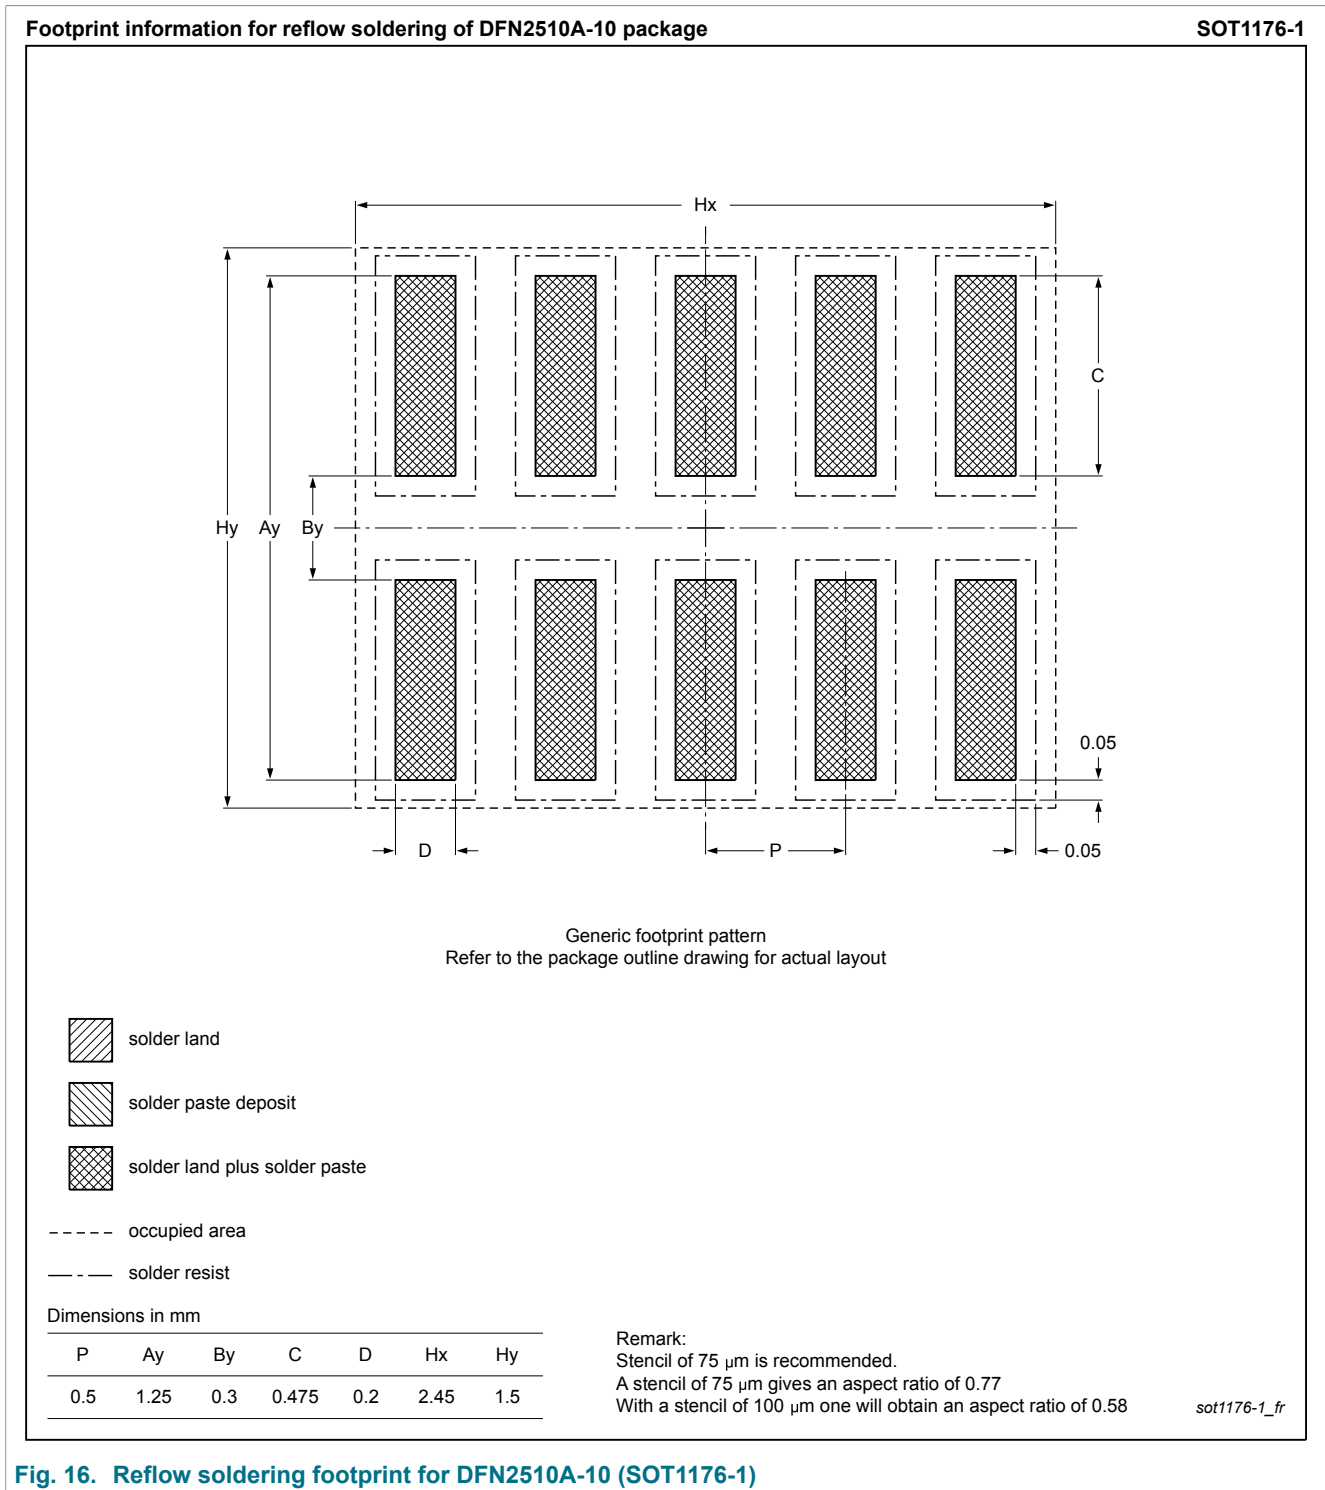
Reflow soldering footprint for DFN2510A-10 (SOT1176-1)
